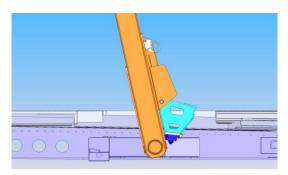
Sec. 3(11)v Stacking block in lowered position showing the sliding "safety pin" engaged (note no RED visible), the "O-ring handle", the "safety latch" engaged.
